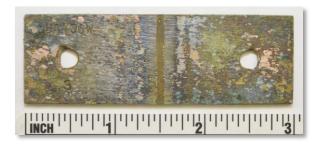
90-10 Cu-Ni 1-inch by 3-inch coupon with weld.
